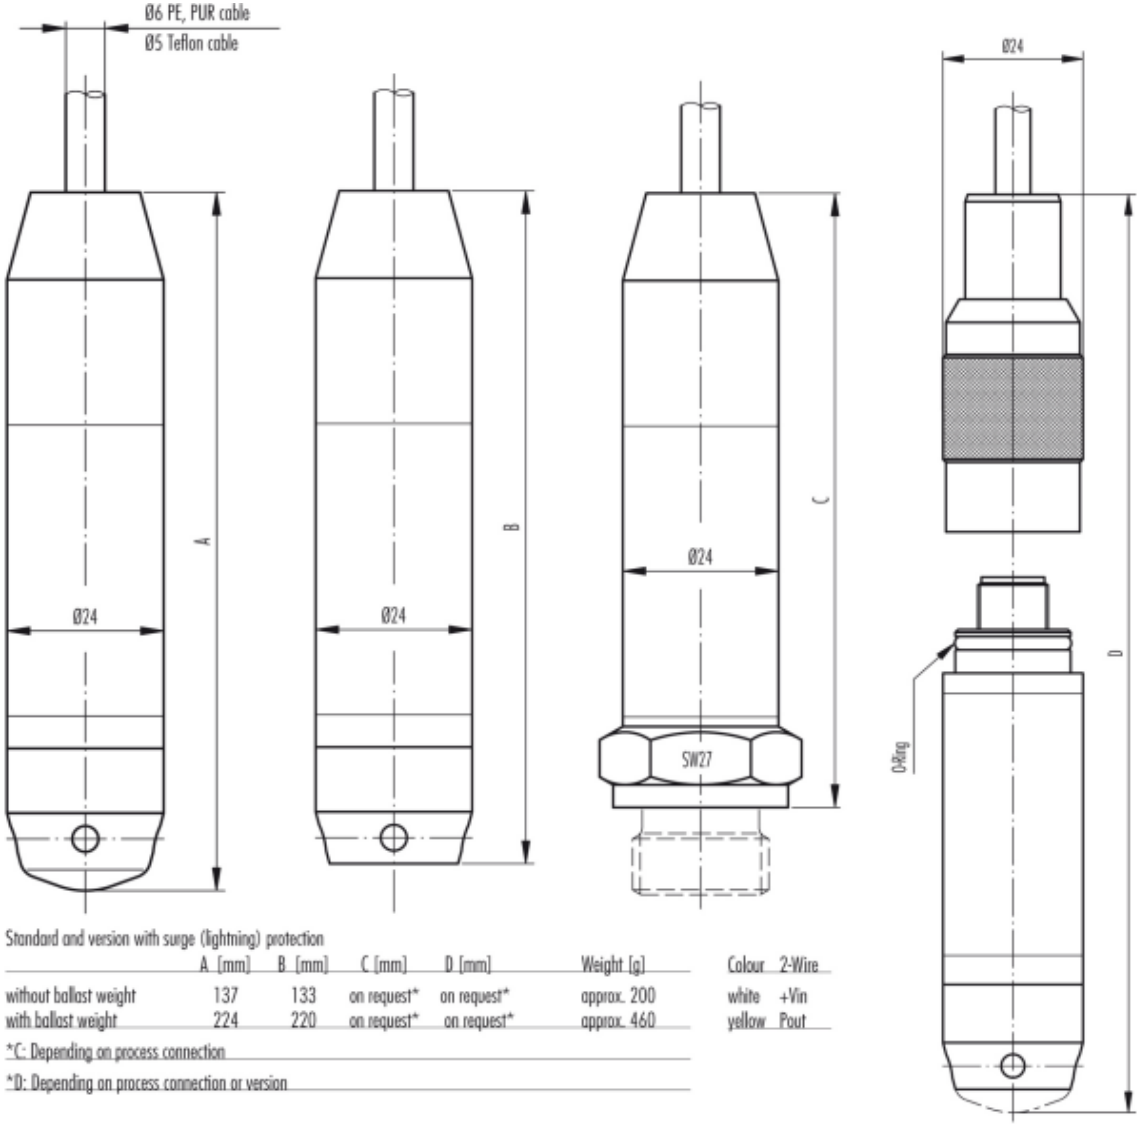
Technical drawing pressure sensor (STS-sensors, 2008)
